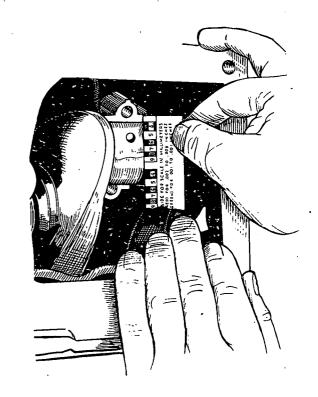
MEASURING BEARING CLEARANCE WITH PLASTIGAUGE
